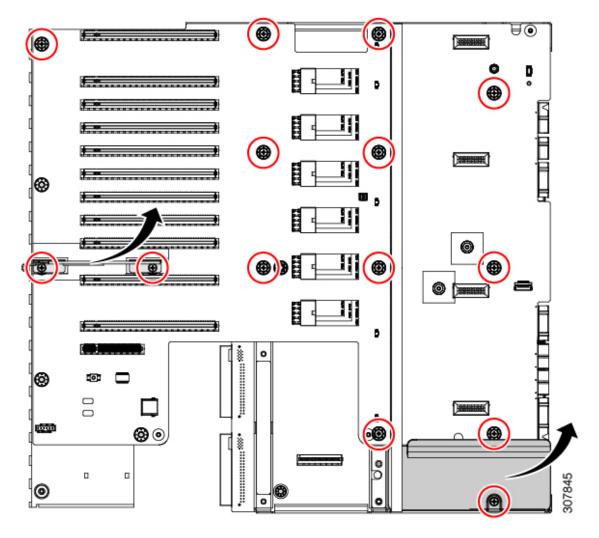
Location of Mounting Screws, Baffle, and PCBA Bracket (Top Down View)
